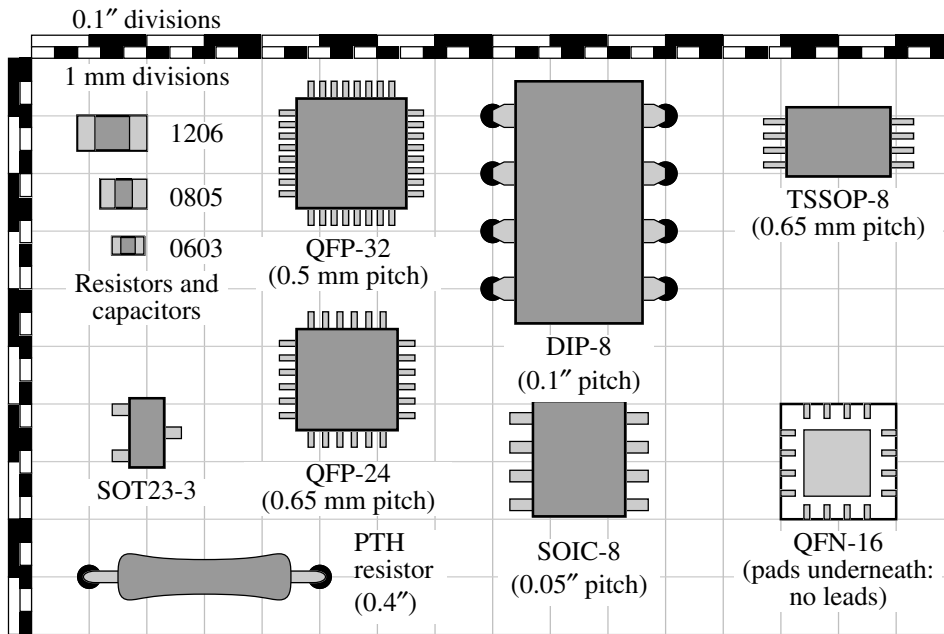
Pin-through-hole and surface-mount (gull wing) integrated circuits. Some surface-mount packages have solder pads underneath them, usually for heatsinks. There may also be an adhesive pad to mount the component until it has been soldered.
